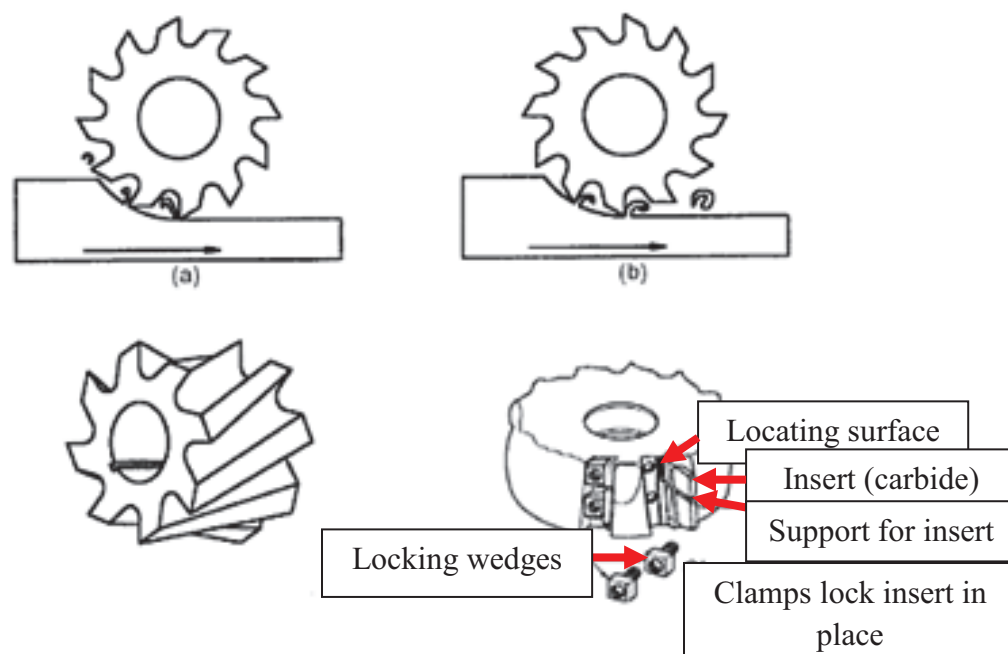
Milling cutters : (a) Up Milling, (b) Climb Milling
